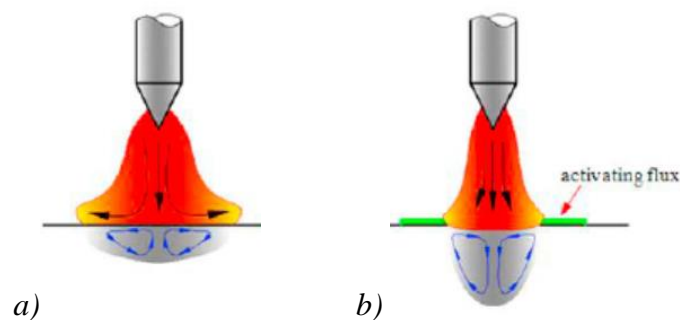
Schematic preview of the Marangoni effect of liquid melted metal flow in weld joint; a) TIG welding process, b) ATIG welding process
